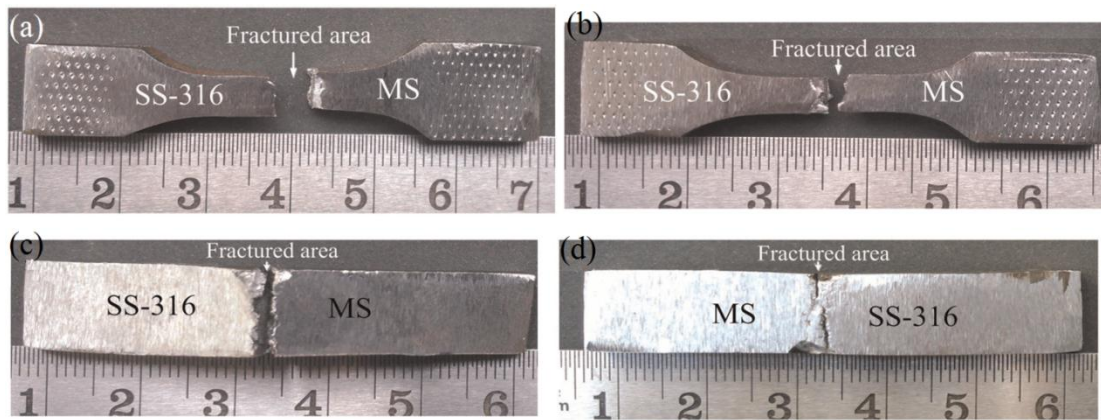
Photographs of fractured (a) and (b) tensile specimens and (c) and (d) 3-point bend test specimens (Bansal et al., 2016)
